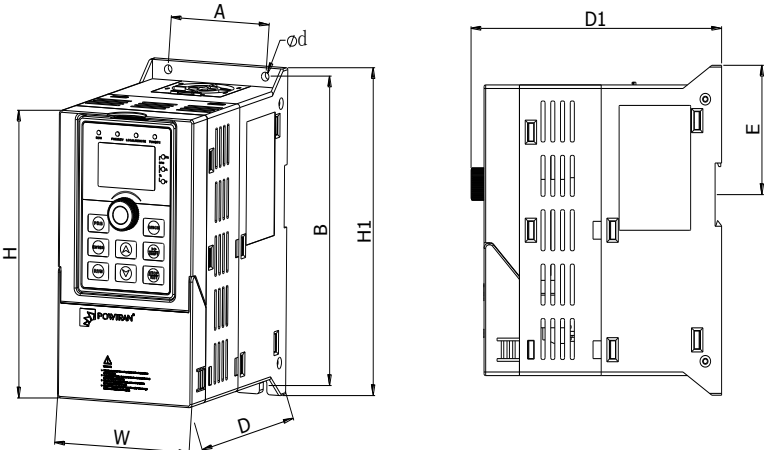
15kW G3 and above power product outside drawing, installation dimension
